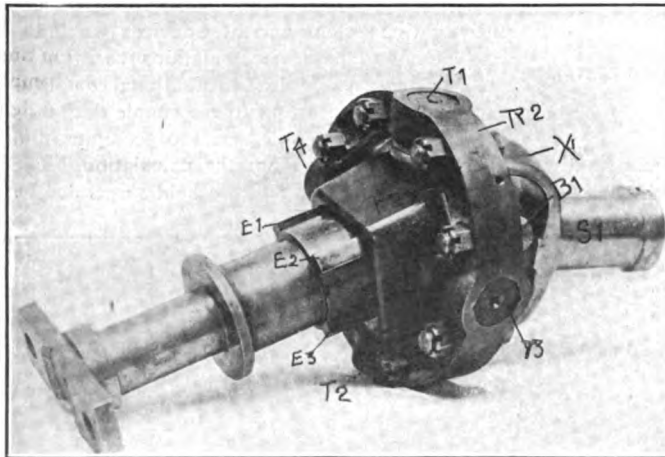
Presenting universal joint with grease-tight housing removed, indicating liberality of bearing surfaces and efficient slip joint
